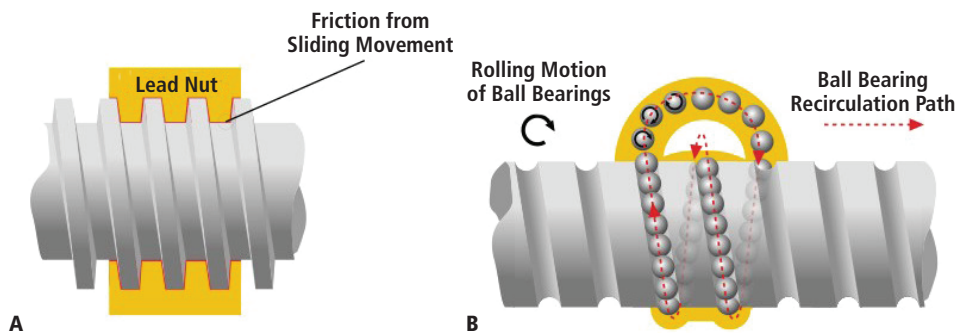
A lead screw and lead nut (A). The threads of the lead screw and lead nut slide over each other. Rotary motion of the lead screw is converted into linear motion of the lead nut. A ball screw drive (B) uses recirculating ball bearings which roll in grooves. Rolling is much lower friction than sliding. Rotary motion of the screw is converted into linear motion of the bearing block.
